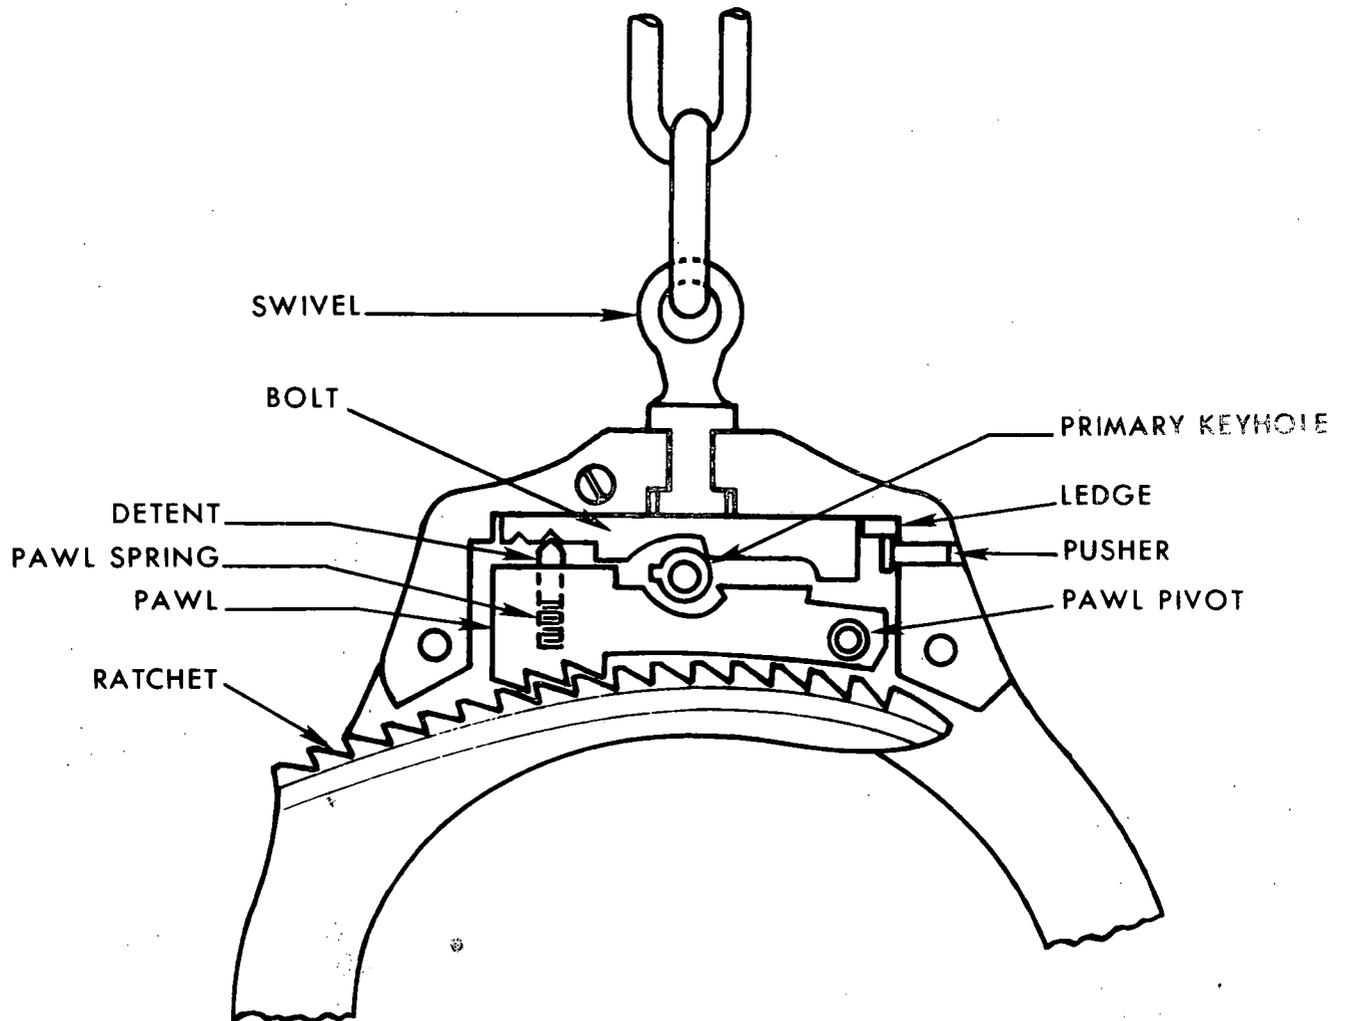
Cross section of a modified handcuff with the double lock bolt active and held in place by a locking ledge.
